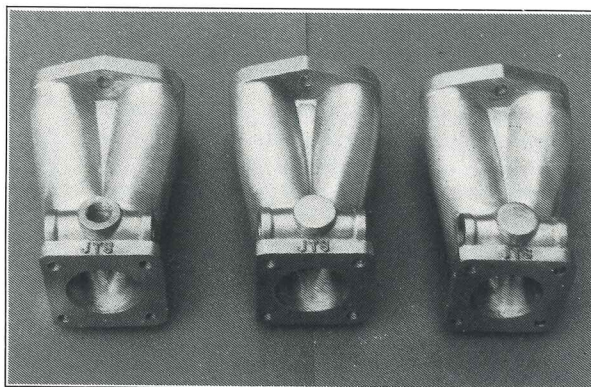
The 3 manifolds machined and ready for fitting to the head.
